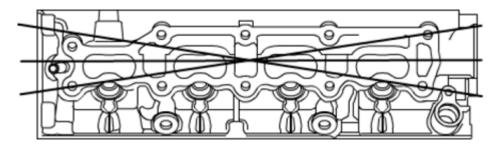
Inspecting Intake And Exhaust Manifold Courtesy of SUZUKI OF AMERICA CORP.
